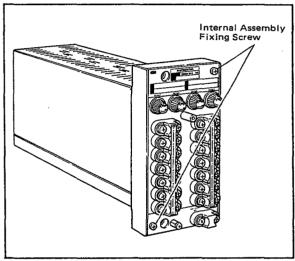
Removing the Internal Assembly (SDBU-24[]).
